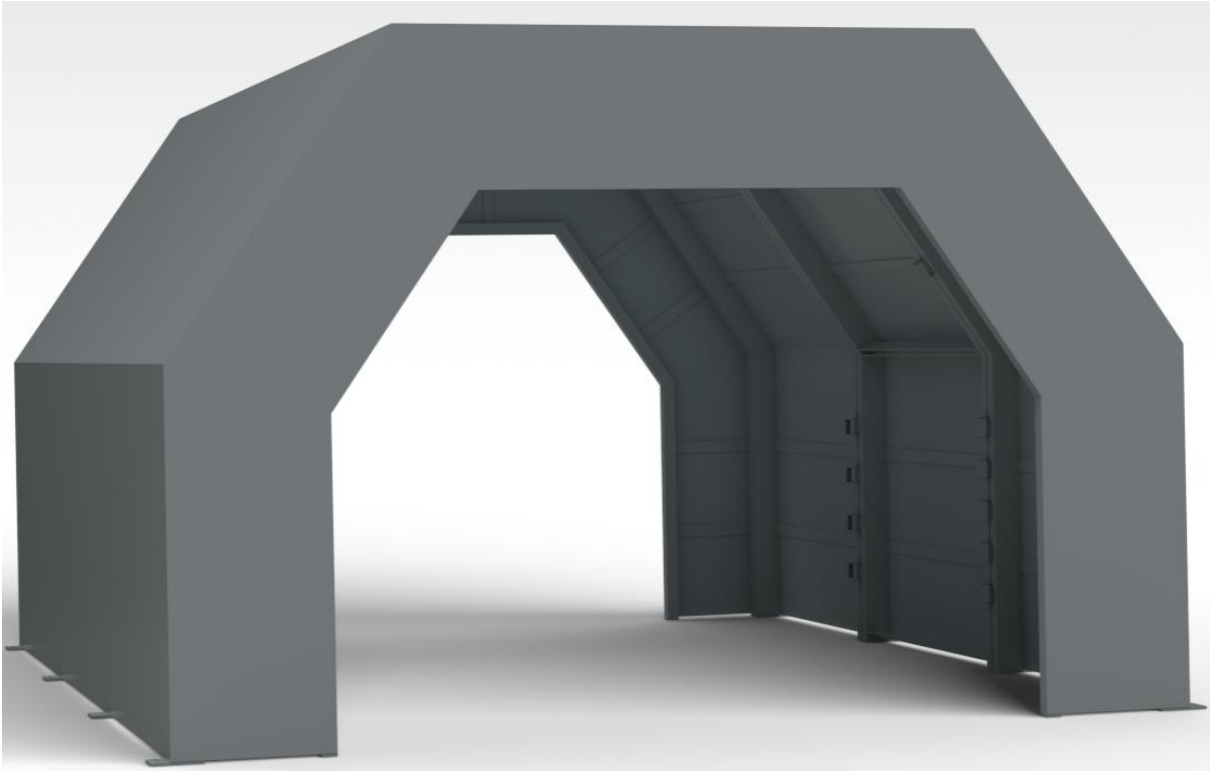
CAD model of the paint surface inspection machine vision tunnel frame. From: the author (2026)
